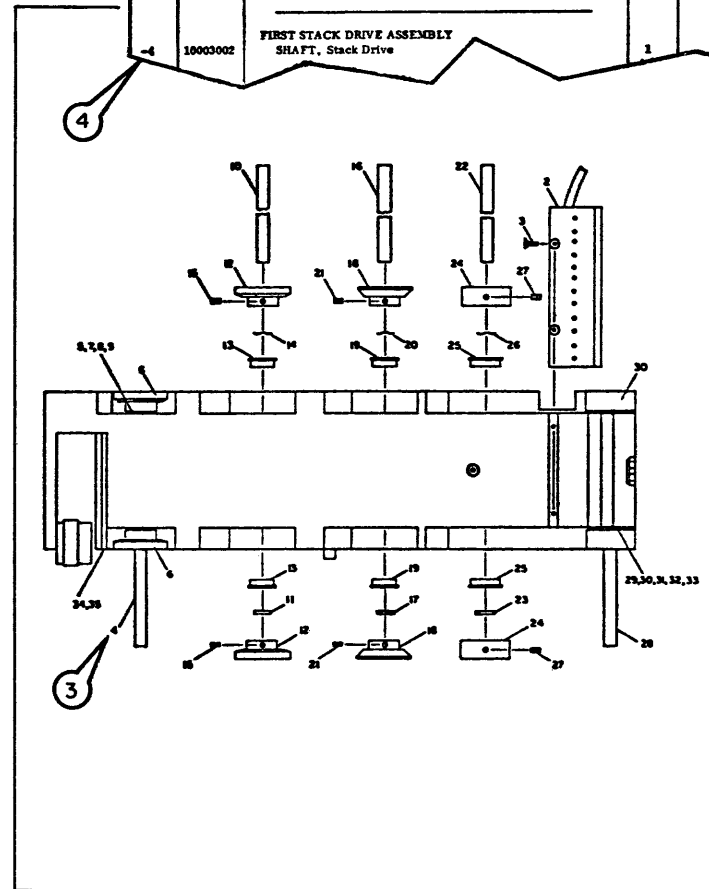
HOW TO USE PARTS BREAKDOWN WHEN PART NUMBER IS NOT KNOWN
